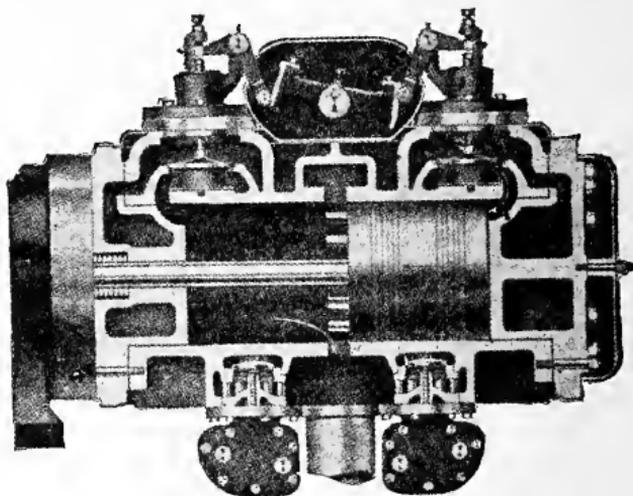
Cylinder and Valve Arrangement in Skinner Uniflow Engine.
